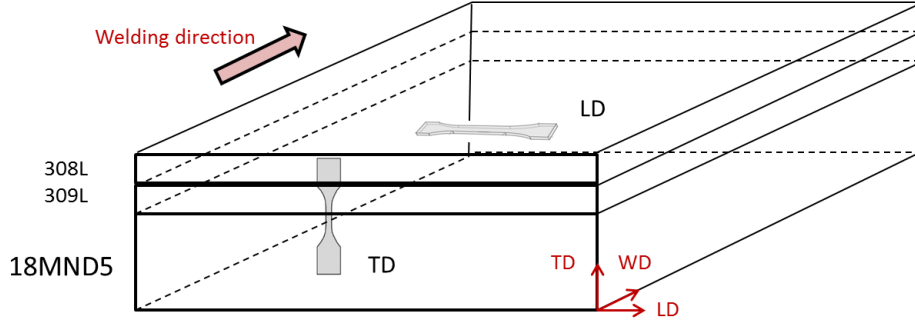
Weld geometry for locating the directions of samples machining, WD stands for welding direction, TD for transverse direction and LD for longitudinal direction.
